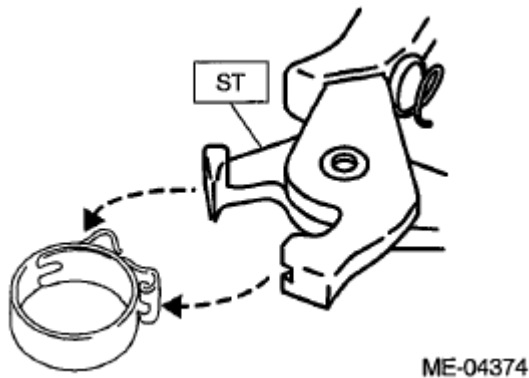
Removing/Installing PCV Hose Clamp Using Clamp Pliers
